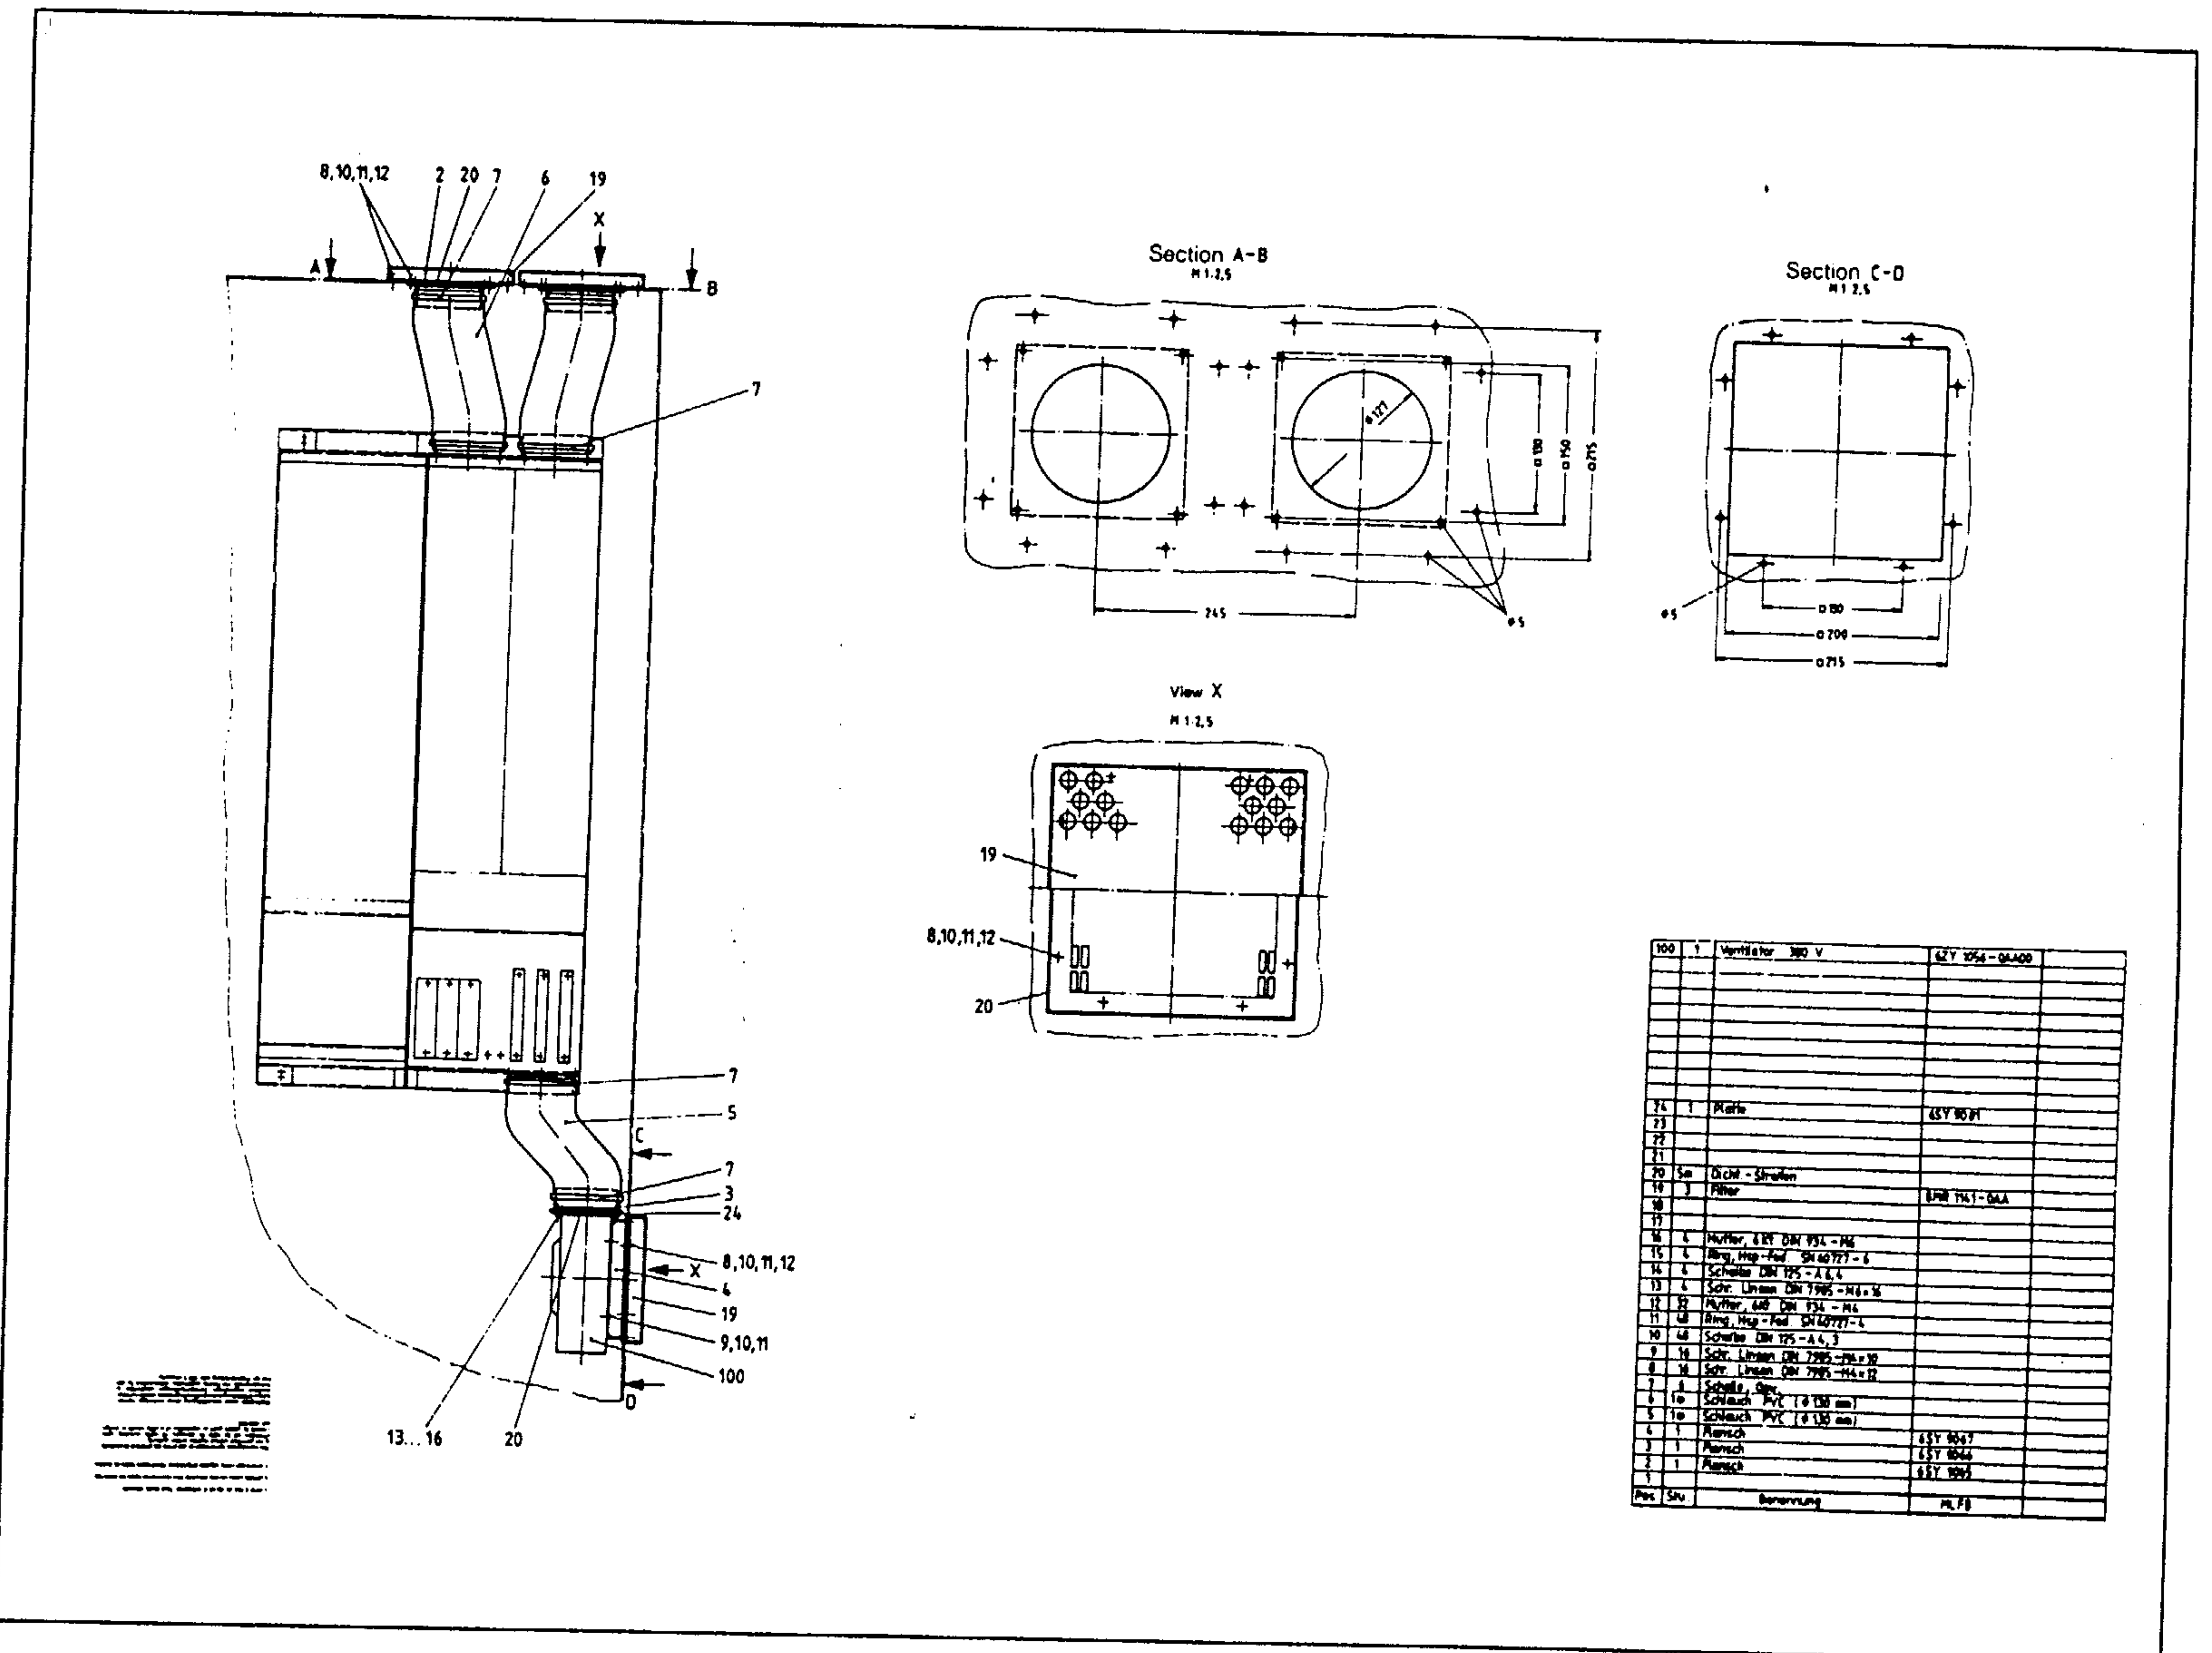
Dimension sheet for external heat dissipation connecting flange, option E55 (6SC6504/06/12)
